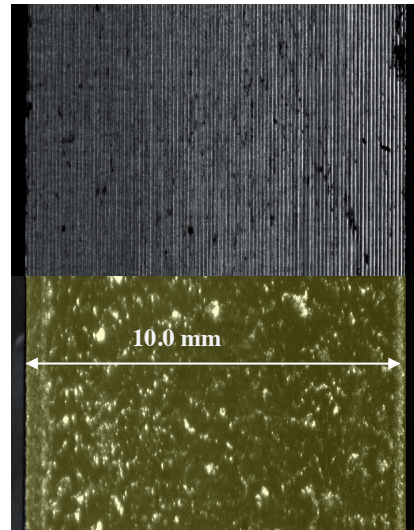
wheel contact surfaces before and after the first 150,000 cycles for test B
